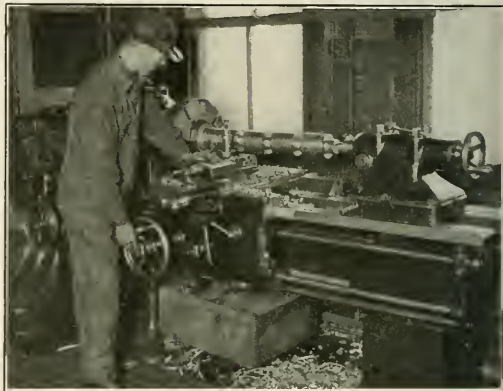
Modern Engine Lathe Machining Wrist Pins
